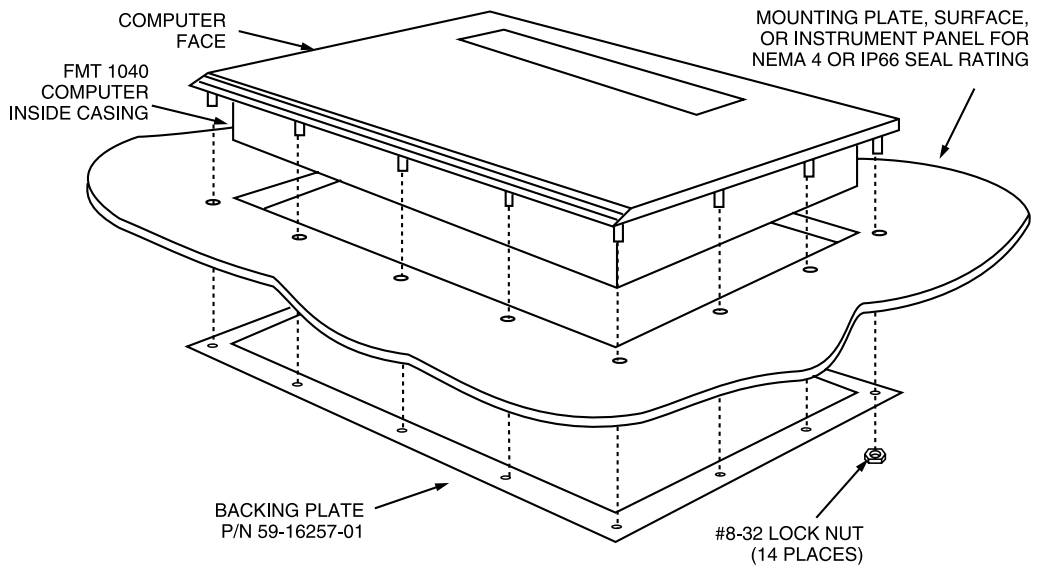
Three-dimensional view of FMT1040, Panel for Flush Mounting, and Backing Plate
